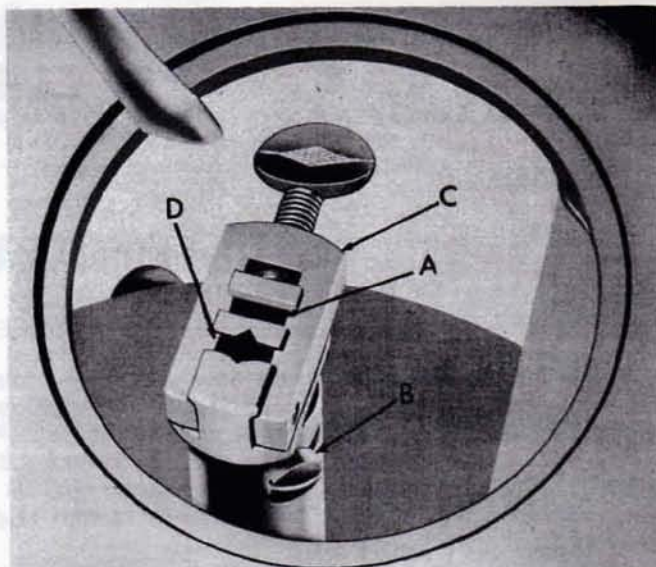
Lower Universal Chuck, Showing Flat and V-Jaws.
